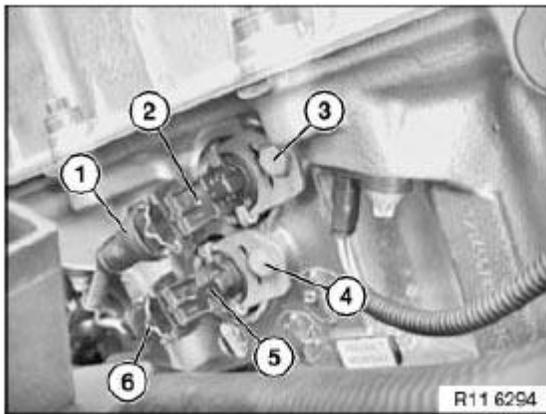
Identifying Solenoid Valve With Plug Connection And Mounting Screws
